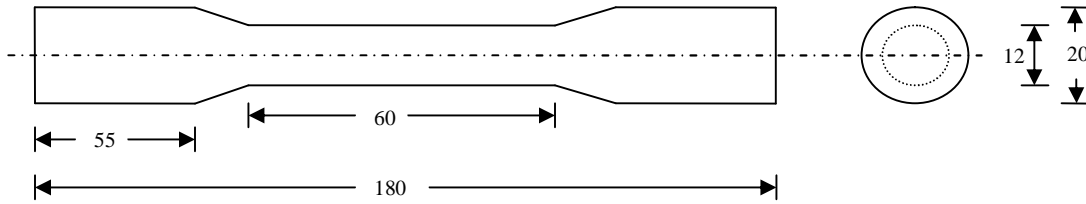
Tensile testing was done on a Universal Testing Machine. Brinell Hardness was measured using Brinell Hardness tester.
